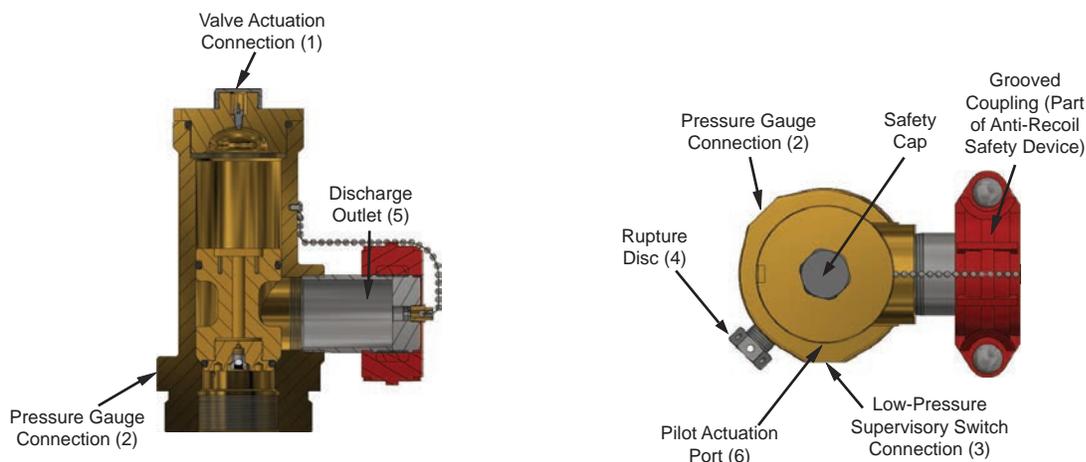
Mv Cylinder Valve Assembly
